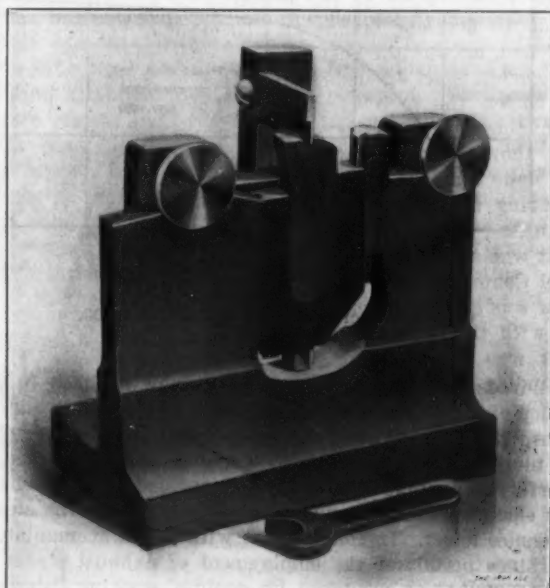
The Setting Gauge, Showing a Tool in Its Holder.
